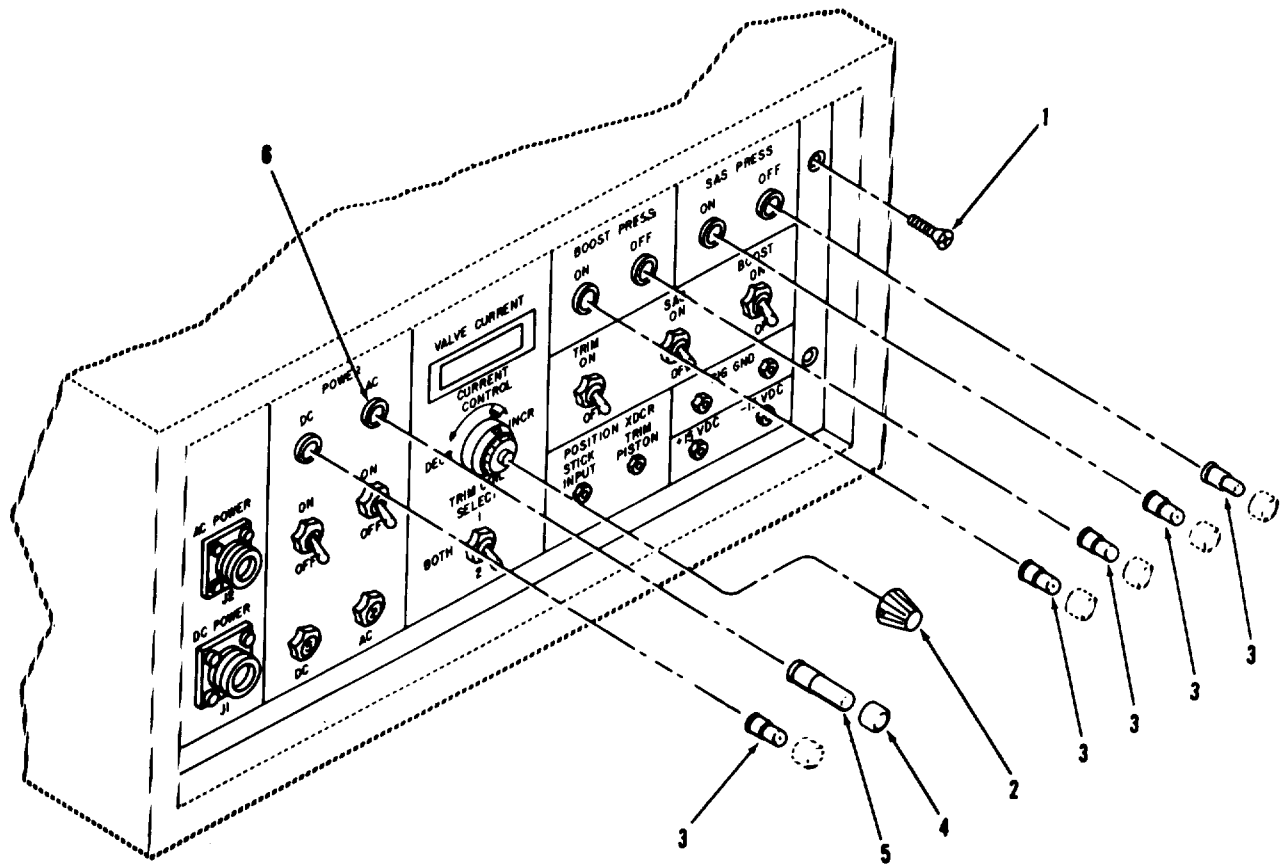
Nulling Fixture Assembly, Pilot Assist
